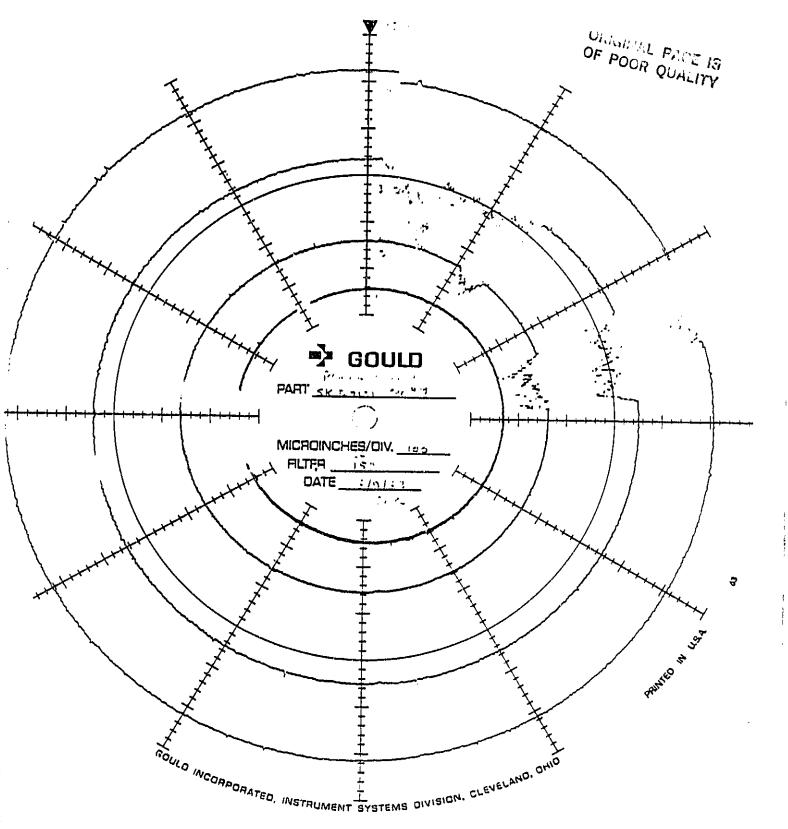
Piston Rub Due to Dry Bearing Operation
